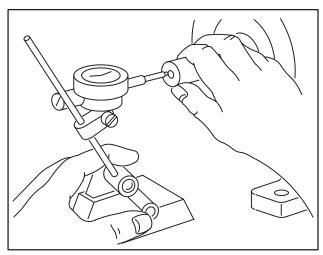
CHECKING END PLAY WITH DIAL INDICATOR
